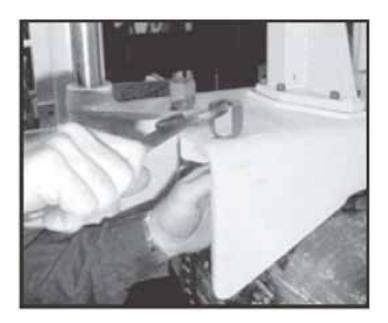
Tighten the chain clamping nut to secure the saw to the pipe.
